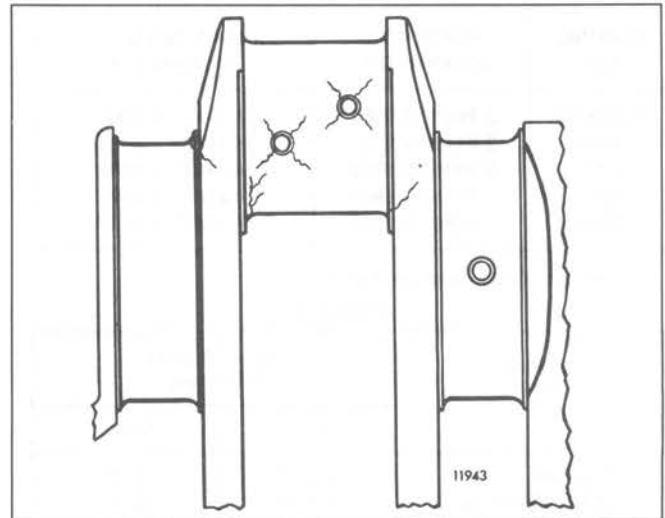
Crankshaft Fatigue Cracks
